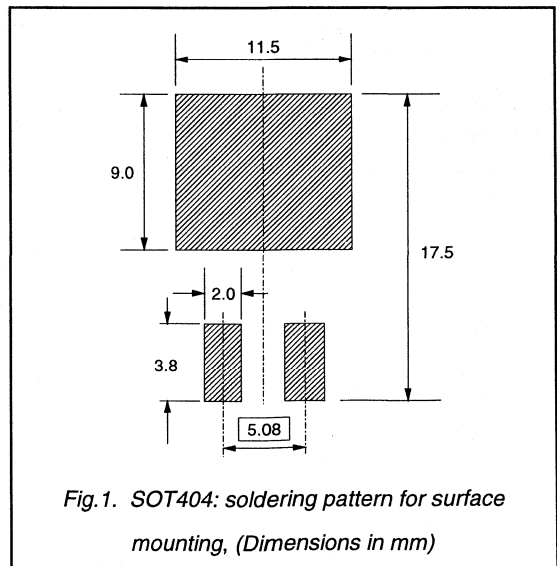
SOT404: soldering pattern for surface mounting, (Dimensions in mm)
